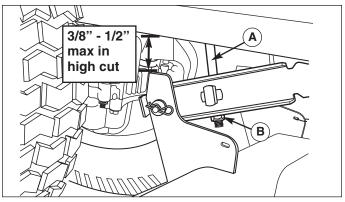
Leveling The Mower Side-to-Side A. Lift Rod B. Locknut
